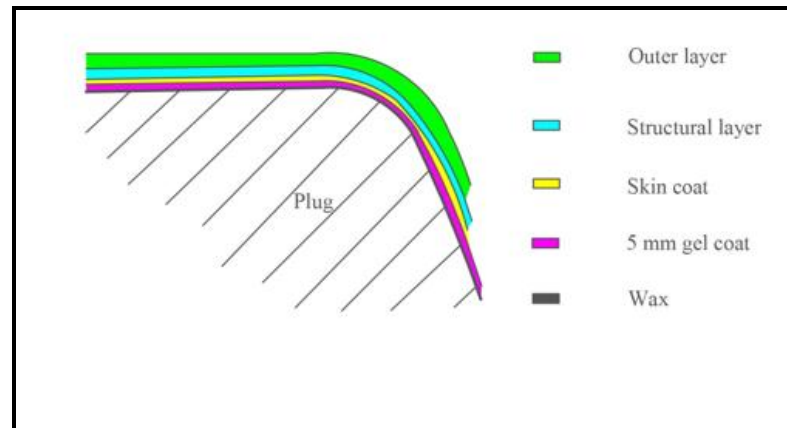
Cross-sections showing the build-up of laminate in a mould
